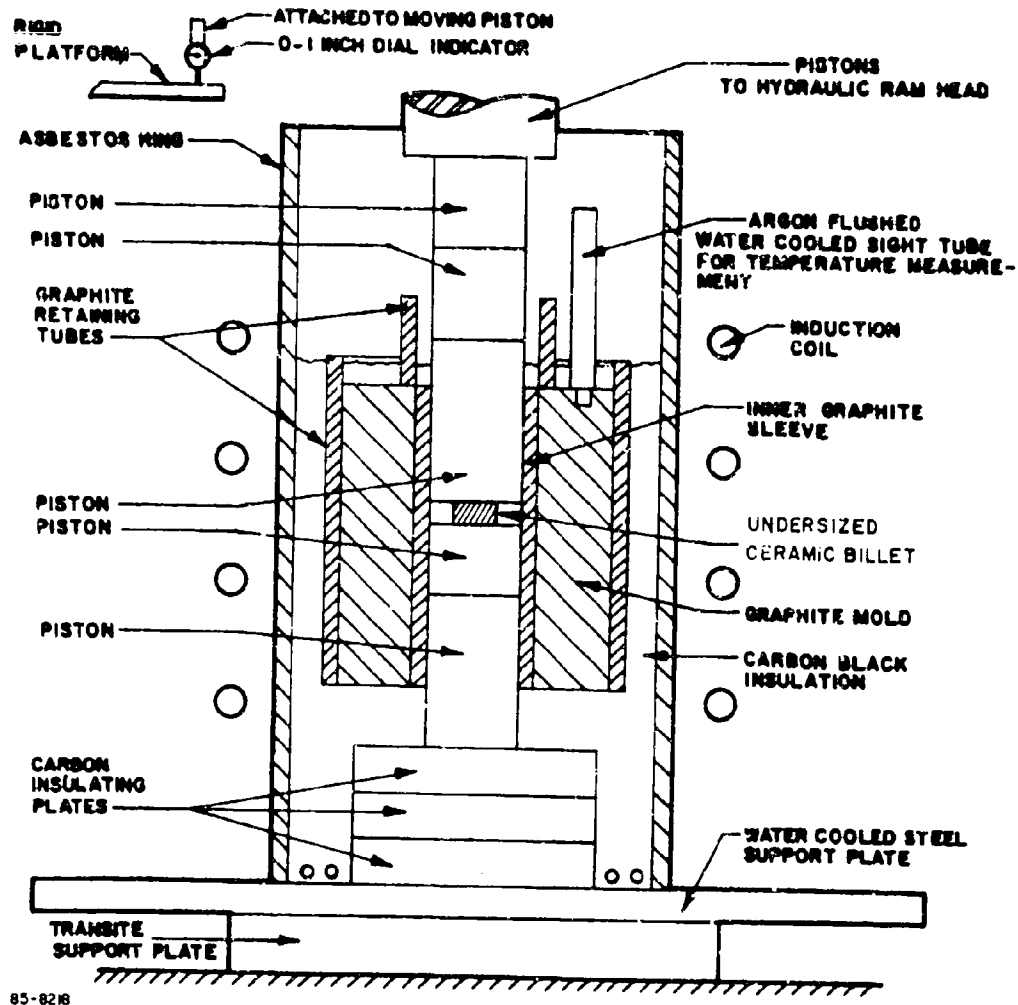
PRESSURE SINTERING APPARATUS USED FOR PRESS-FORGING EXPERIMENTS. NOTE THAT PRIOR TO FORGING, THERE IS NO CONTACT BETWEEN THE SPECIMEN AND THE DIE BODY
